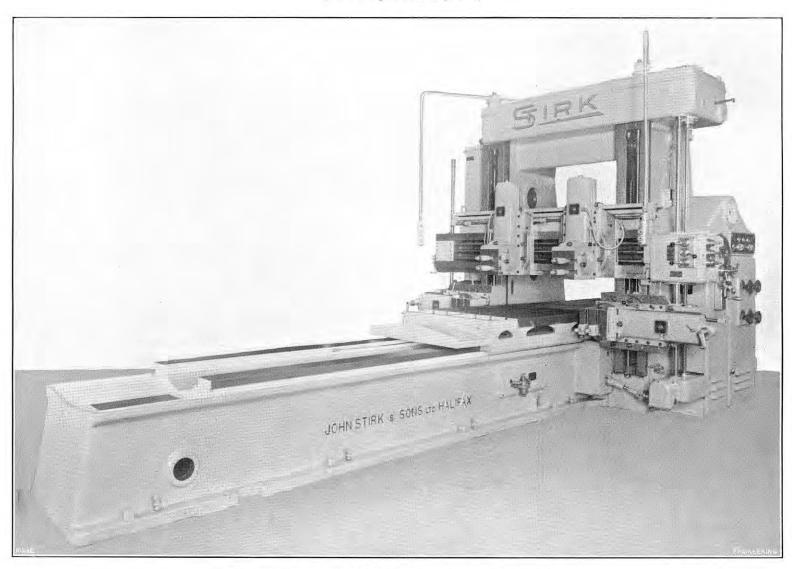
10-ft. Planing Machine; John Stirk and Sons, Ltd.
